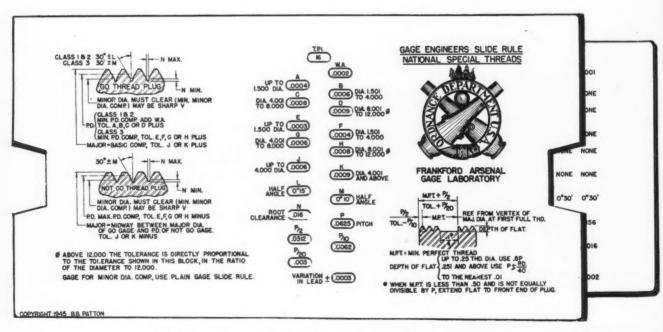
Special gage engineers' slide rule used for designing thread plug gages.
